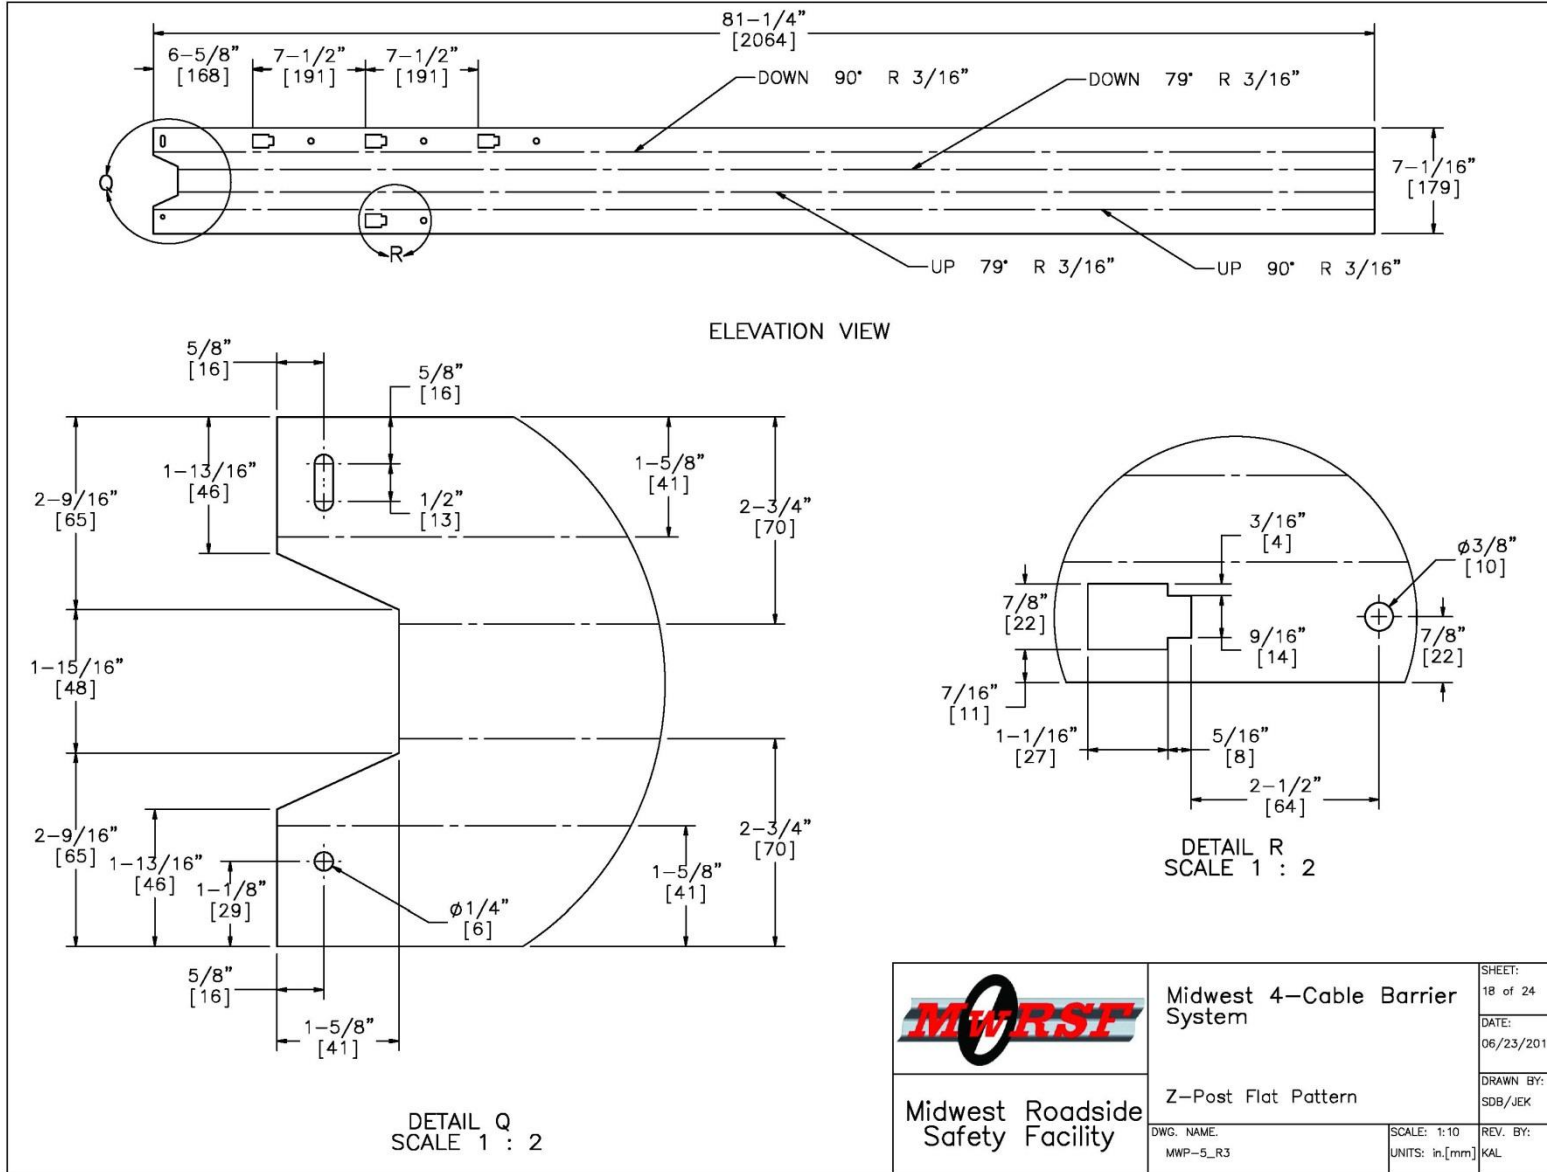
MWP Z-Post Details, Flat Pattern, Test No. MWP-6
